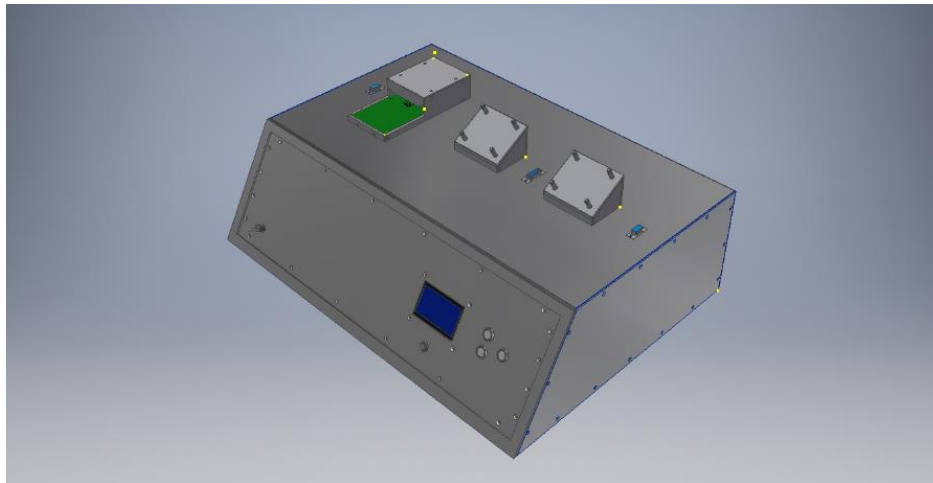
Mechanical Design of Ammo and Memory Cards Test Jig
